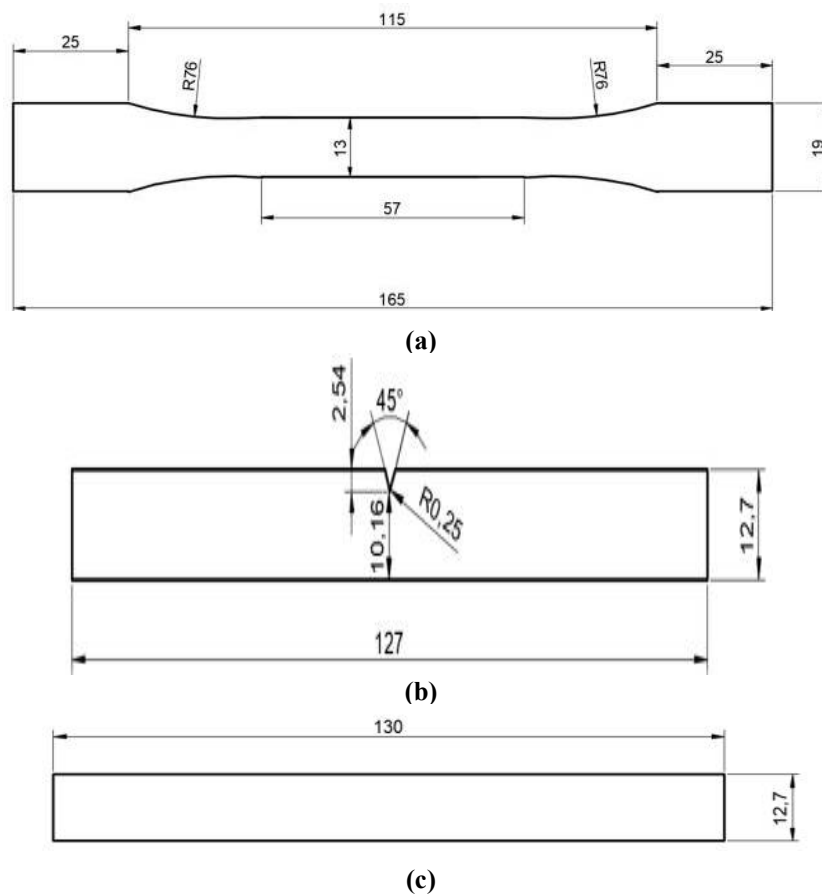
AutoCAD drawing a) tensile test sample b) impact test sample c) flexural test sample Note, all dimensions are in mm.
